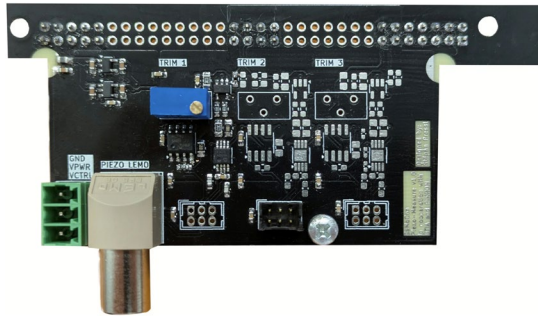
The P-871.140 strain gauge sensor measurement and driver PCB board
